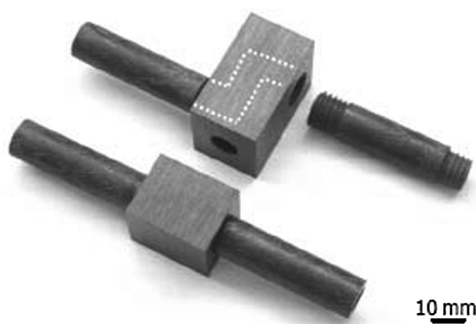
Screw-type mechanical joint of 10-mm inner diameter (12-mm outer diameter) NITE SiC/SiC tube (courtesy of A. Kohyama and T. Hinoki, Kyoto University).
